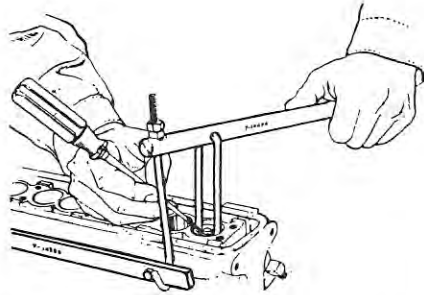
Special tools are provided for removing the valve spring retainers as shown. Refer to text.
